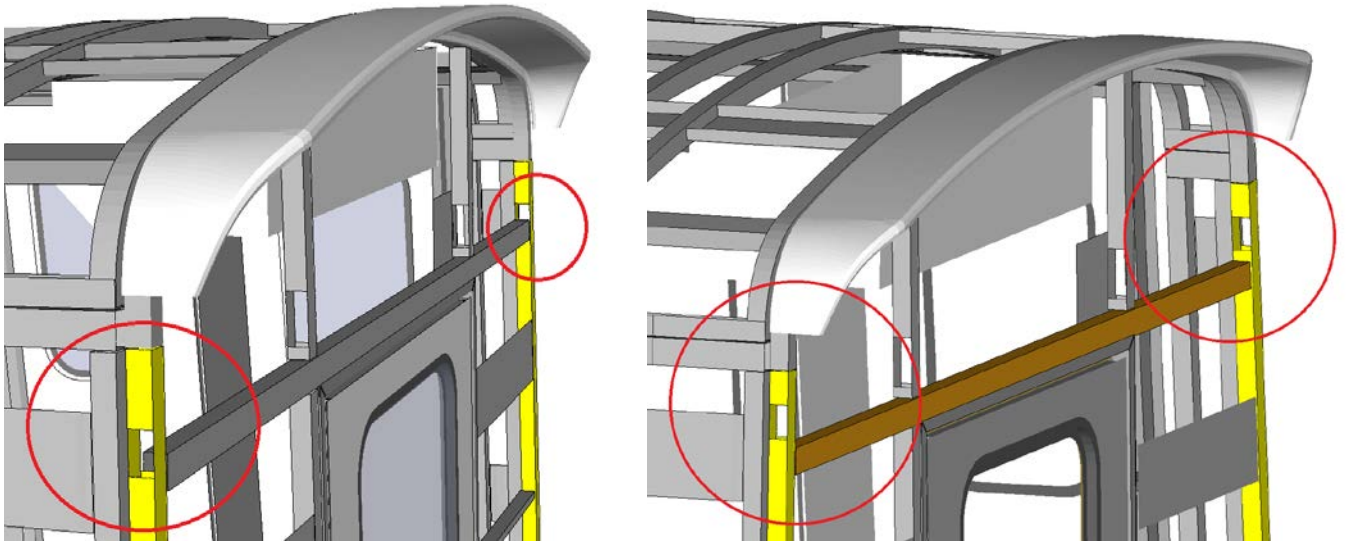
Position of cable pass through in the original back wall structure (left) and in the revised design (right).
